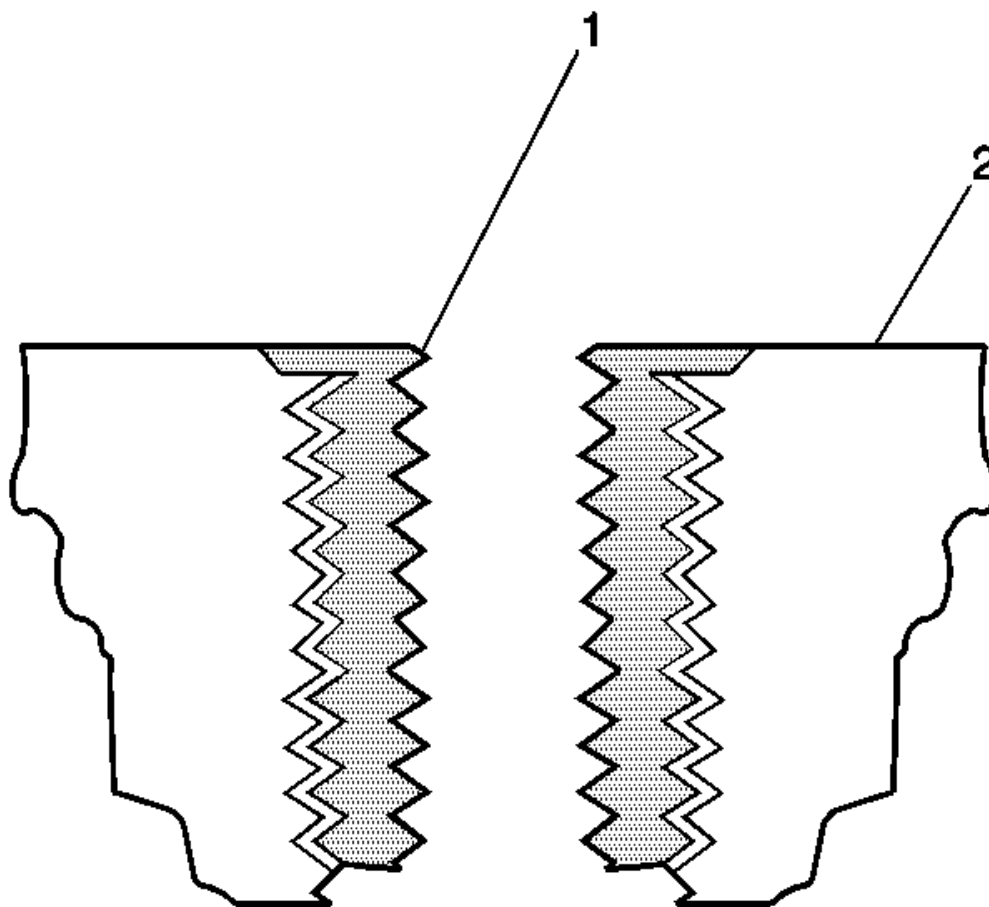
View Of Insert In Tapped Bolt Hole
